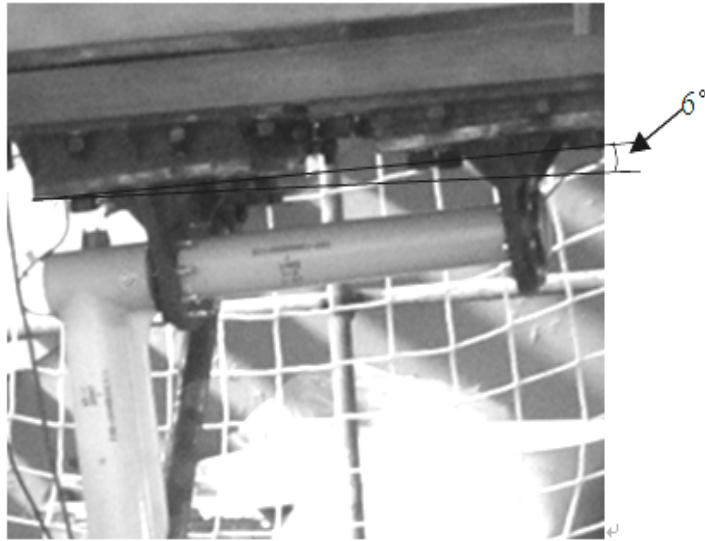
The landing gear fixture of the angle  $6^\circ$
